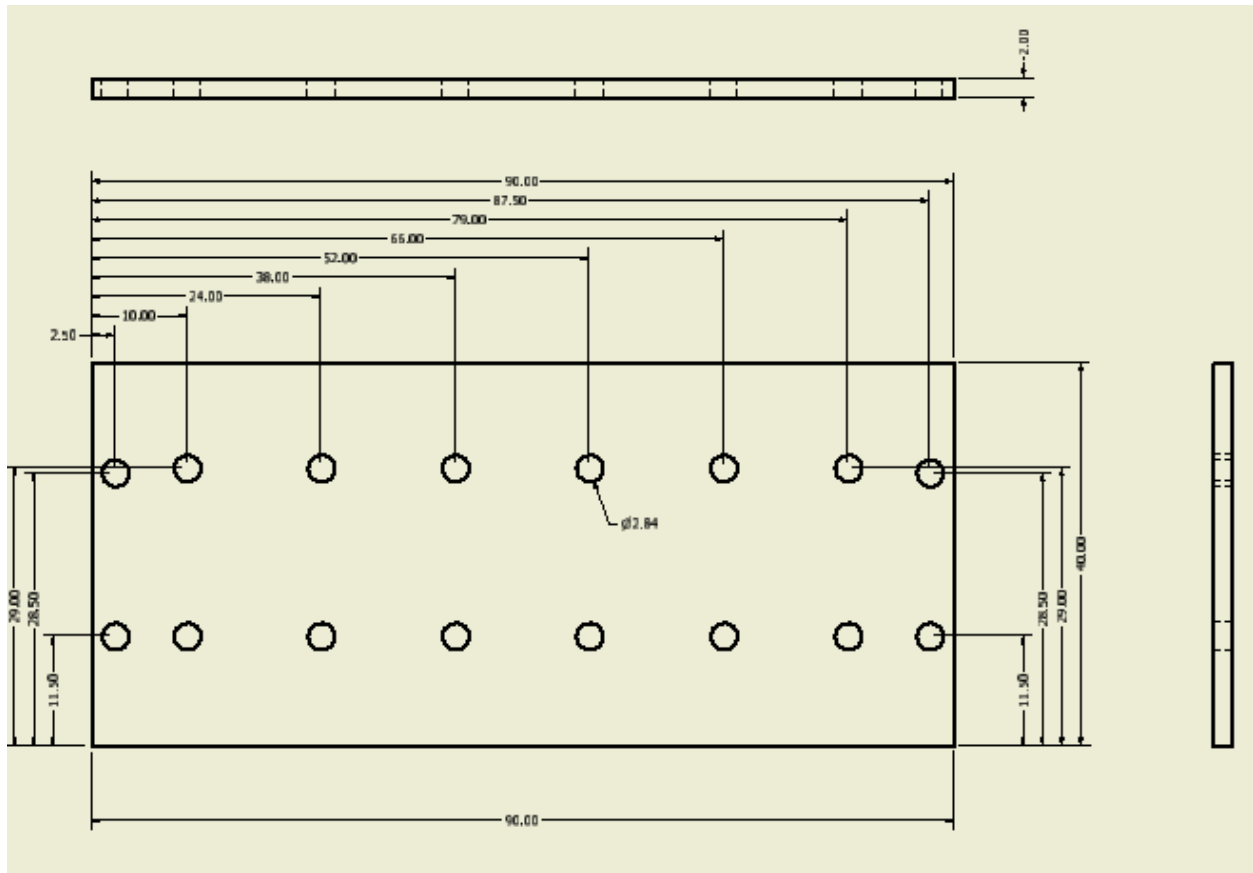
CAD drawings of the bottom plate for the vertical trench test
